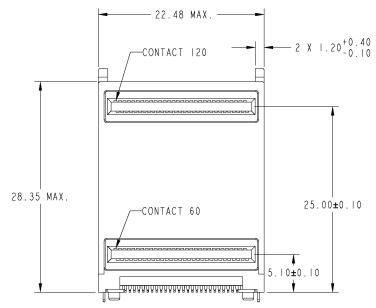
Stacked SMT connector, front view, 19.9mm pitch
